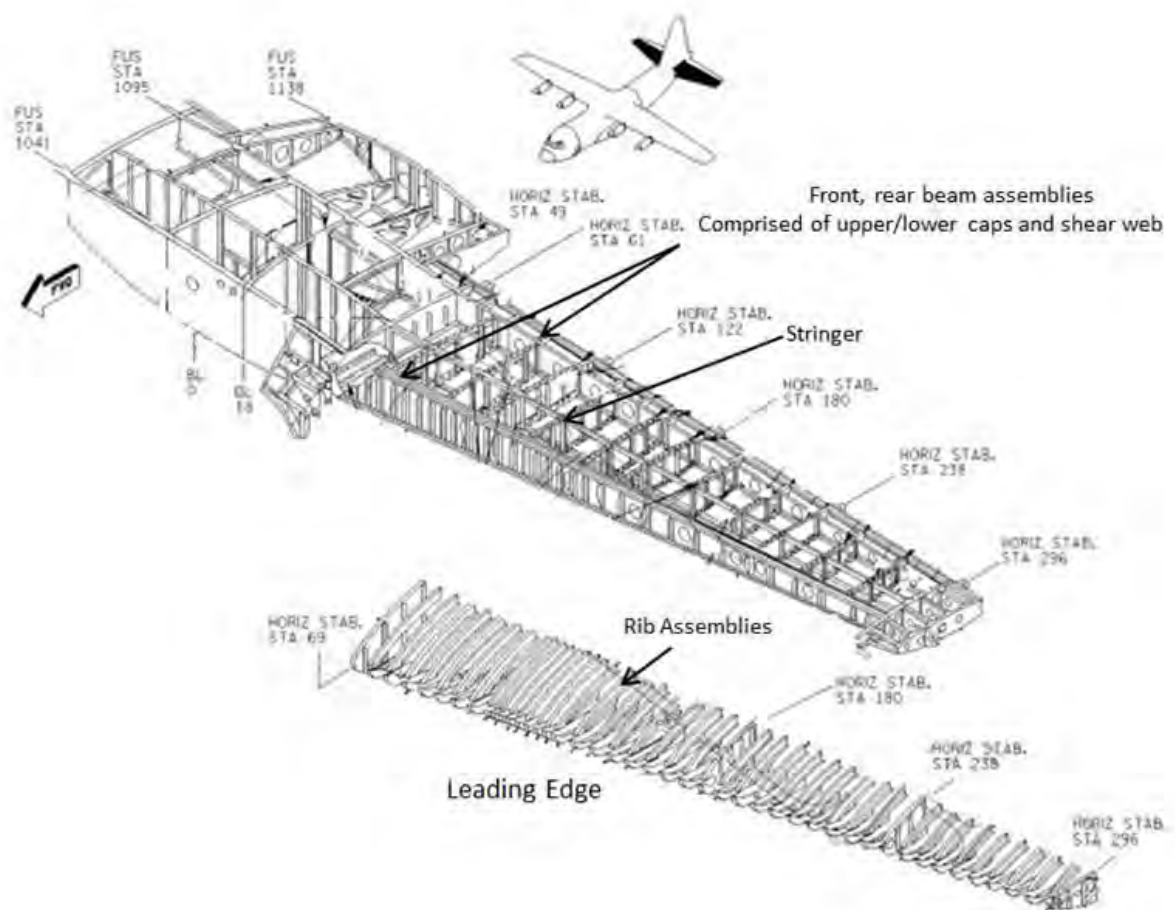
Schematic of Horizontal Stabilizer and Elevator
